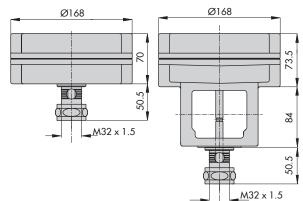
Type 2780-1 (left) and Type 2780-2 (right) · Dimensions in
